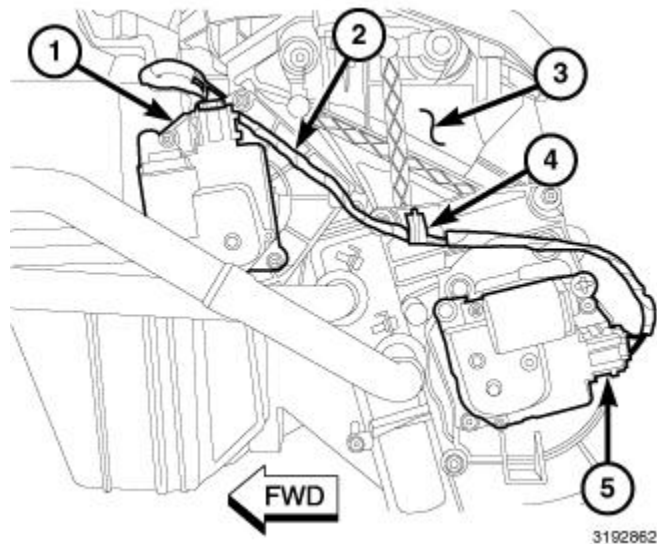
HVAC Wire Harness, Mode Door Actuator, Blend Door Actuator & Air Distribution Housing
